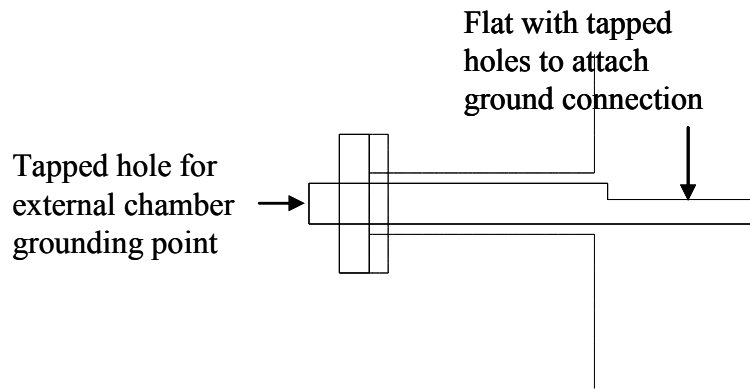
Cross section of grounding flange for shielding around field plate cables. The dotted line shows the tubulated flange located on the chamber extension. The grounding point consists of a metal rod, ending in a flat section with tapped holes allowing the shielding around electrical cables to be attached using screws.
